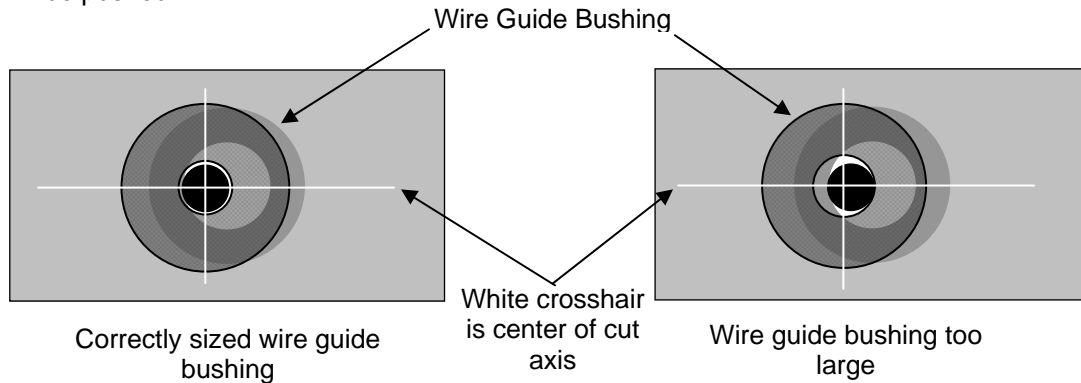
Cut Offset vs. Wire Guide Bushing Fit
